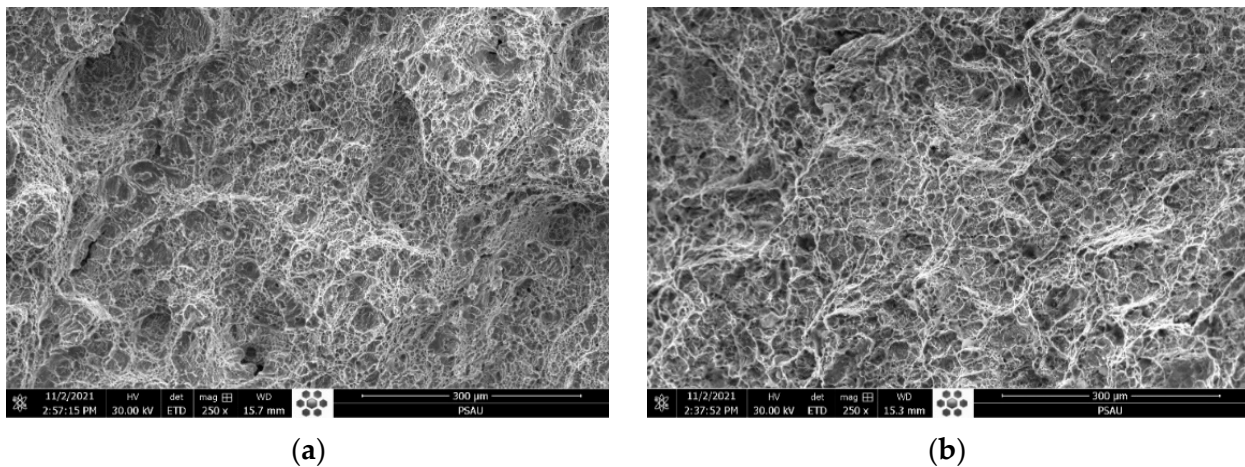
Fractography results of TIG (a) and ATIG (b) impact tests for dissimilar 316L/MS weld.
